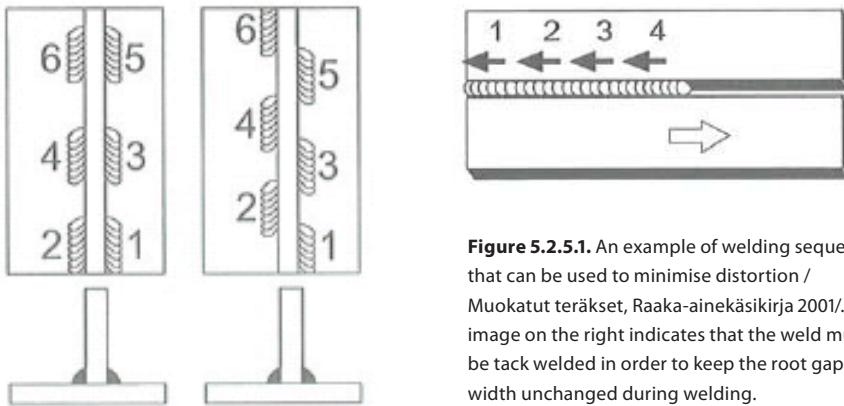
An example of welding sequence that can be used to minimise distortion / Muokatut teräkset, Raaka-ainekäsikirja 2001/. The image on the right indicates that the weld must be tack welded in order to keep the root gap width unchanged during welding.
